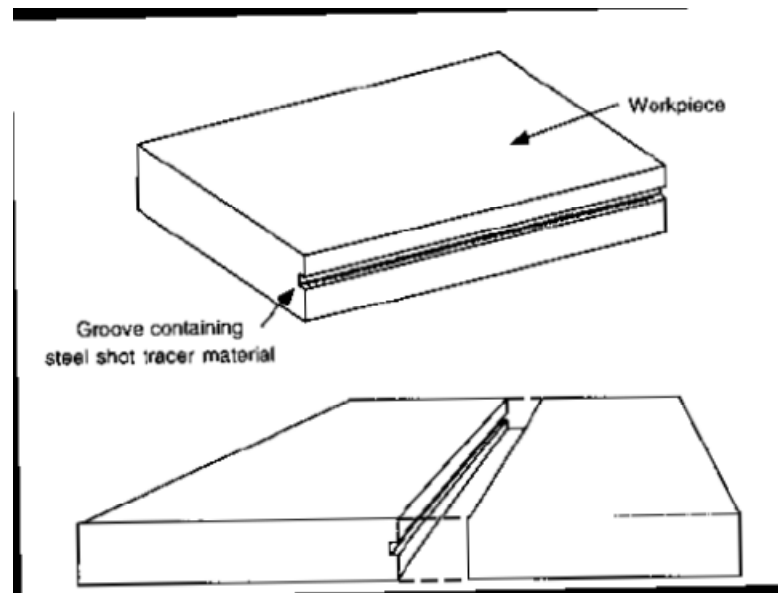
Tracer technique devised by Colligan et al. Steel shot is embedded in a groove which runs along one side of the weld seam.
